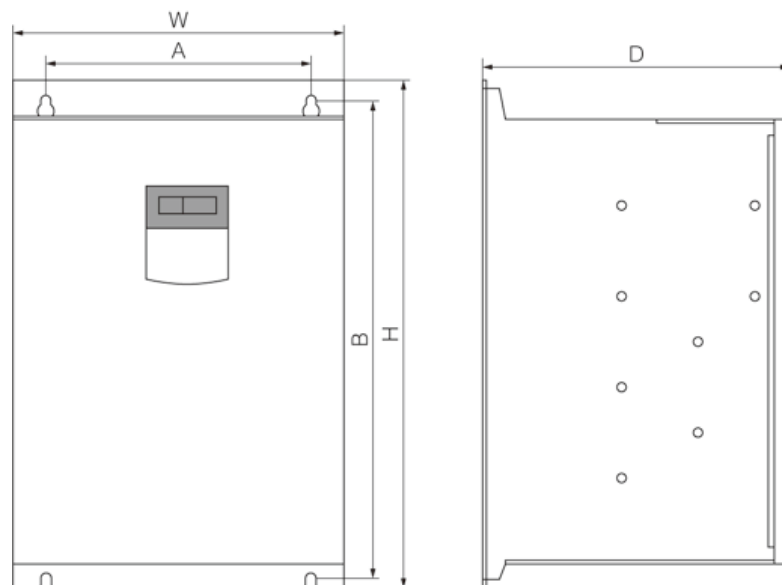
Dimensions of the 22 to 132kW model (380V)
